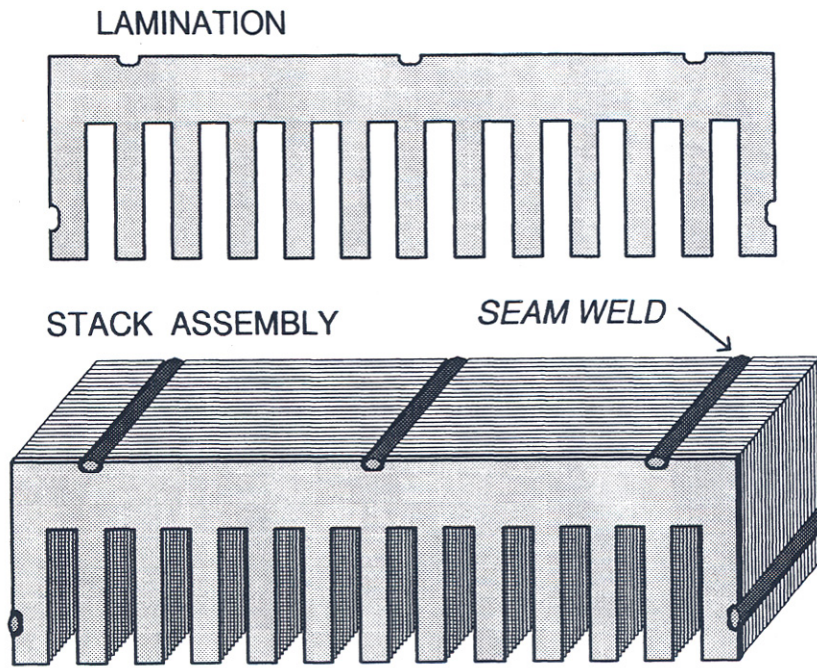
Laminated stack assembled with the aid of seam welds.
